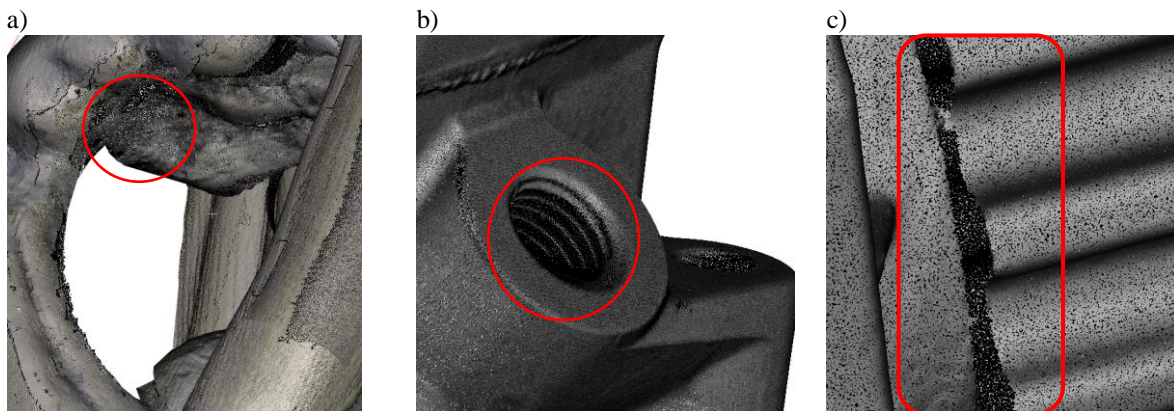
Examples of areas with discontinuities caused by occlusions: a) the inner part of Gargoyle's hand; b) inside of threaded hole in thermostat housing; c) cavity between the pulley and water pump chassis.
